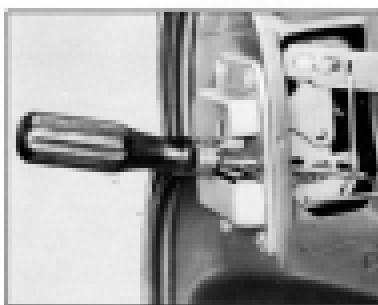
Engaging "Free Wheeling" Device ('58 Sedan)
